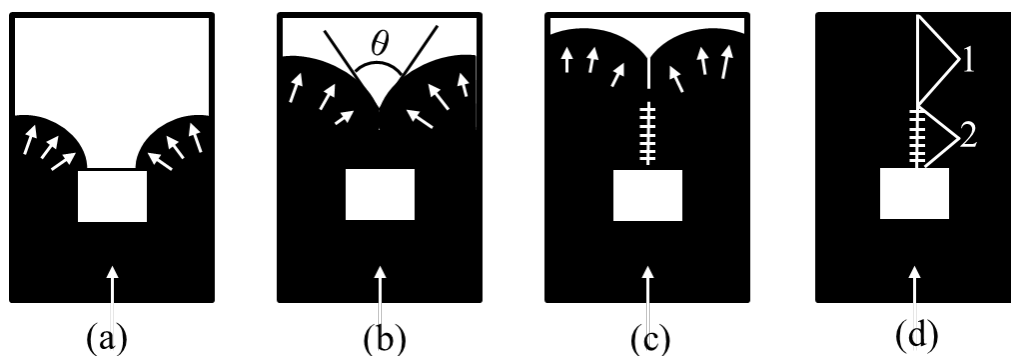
Formation of weld line and meeting angle ⁹¹⁾
